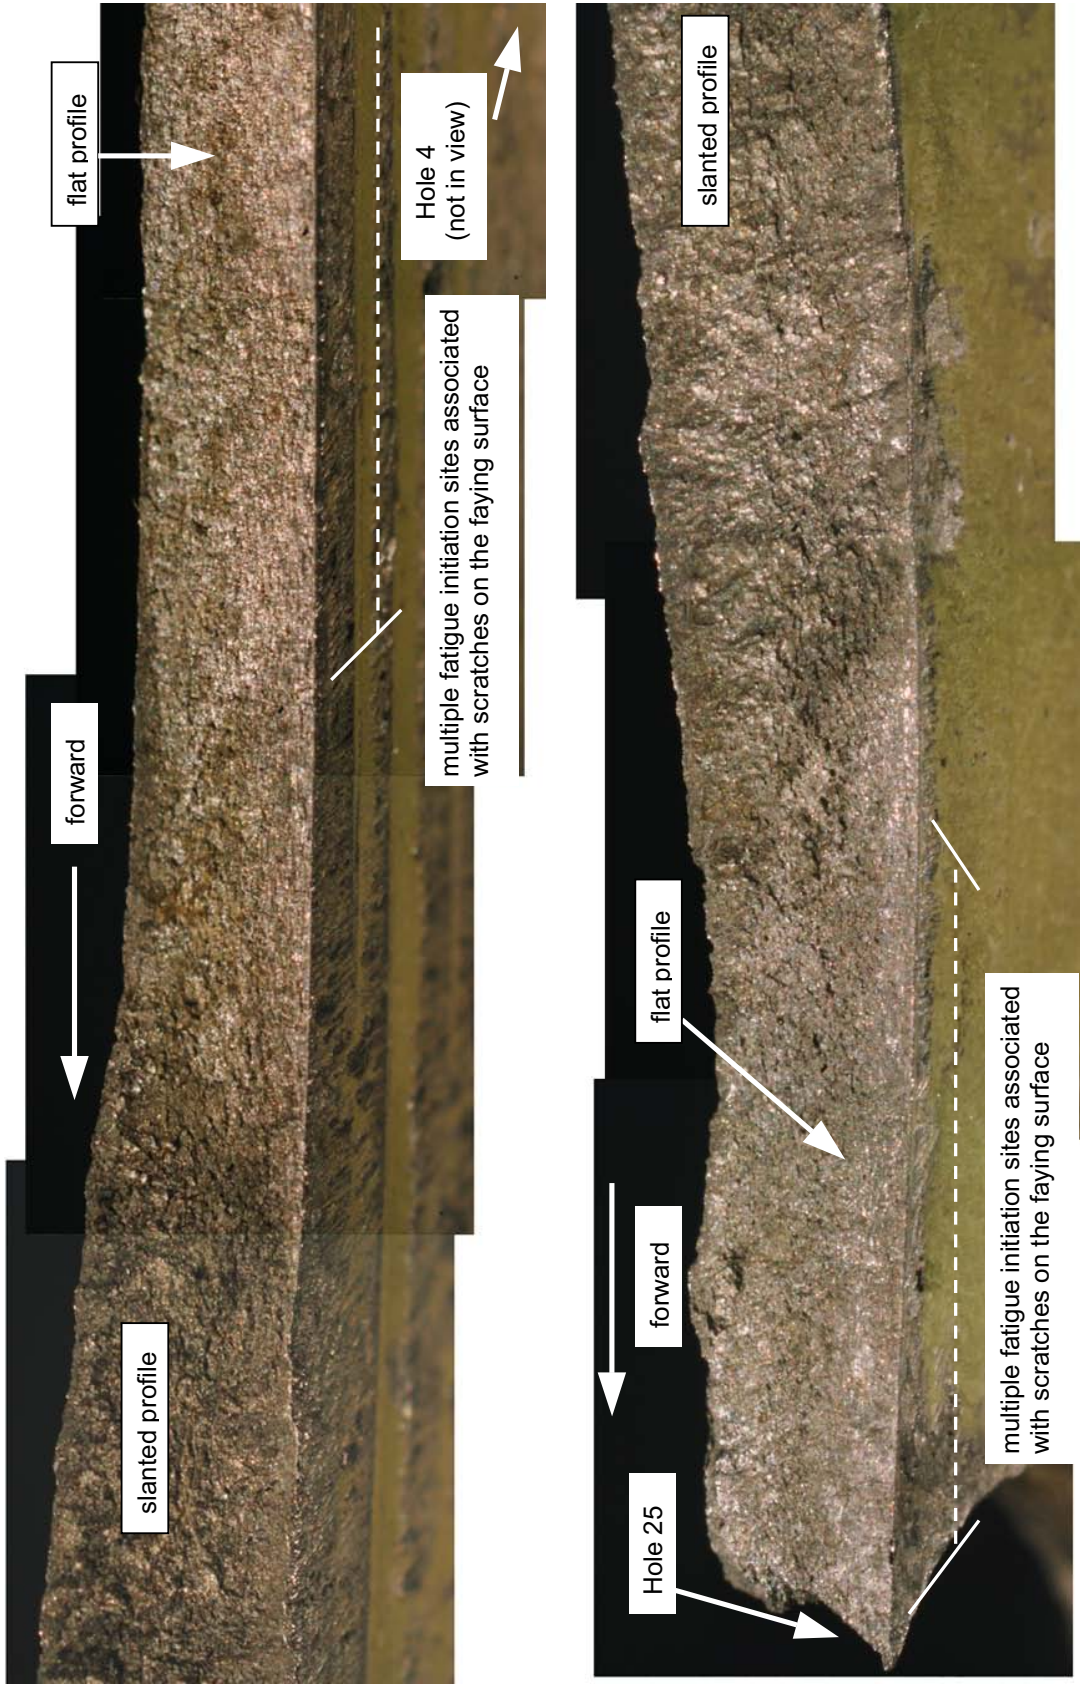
, Photographs showing the transition regions from flat fracture profiles to slanted profiles just forward of fastener Hole 4 (top) and Hole 25 (bottom).
